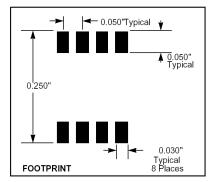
Footprint of IP Lock device (All dimensions in inch)
